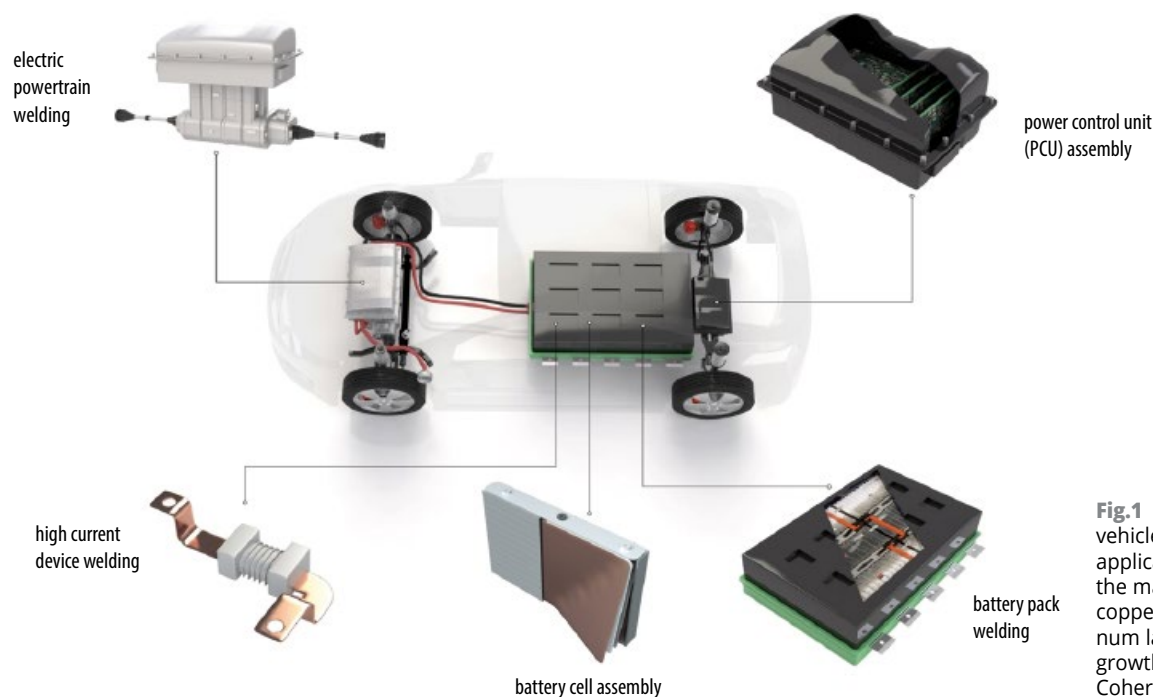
Electric vehicle welding applications are the main drivers in copper and aluminum laser welding growth (Source: Coherent)
